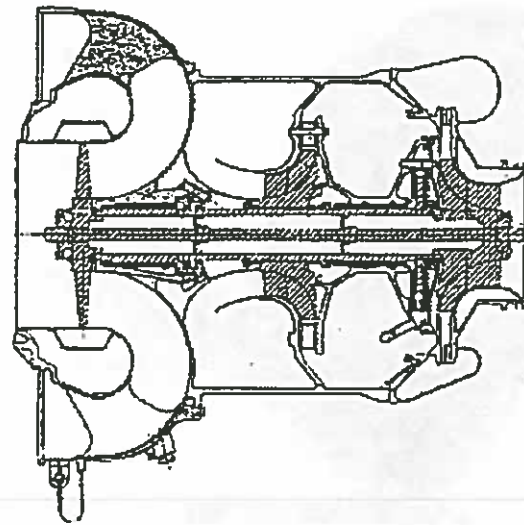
L-1011 Foil Bearing Air Cycle Machine
